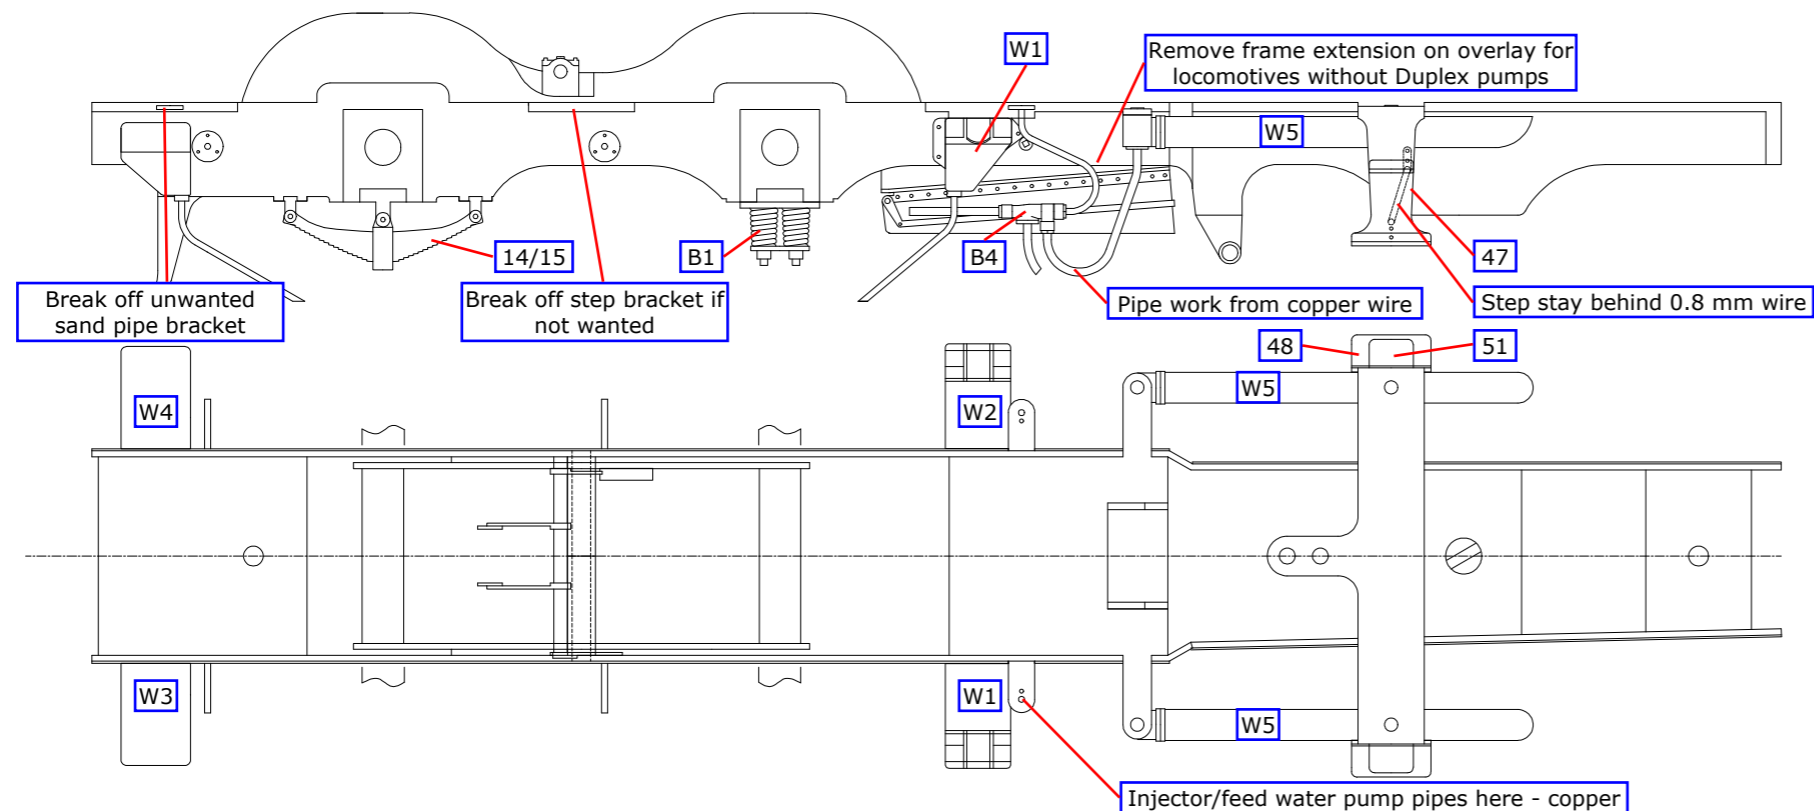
Frame Detailing of Short Frame with Injectors. No Front Steps. Front Sandboxes below Footplate
